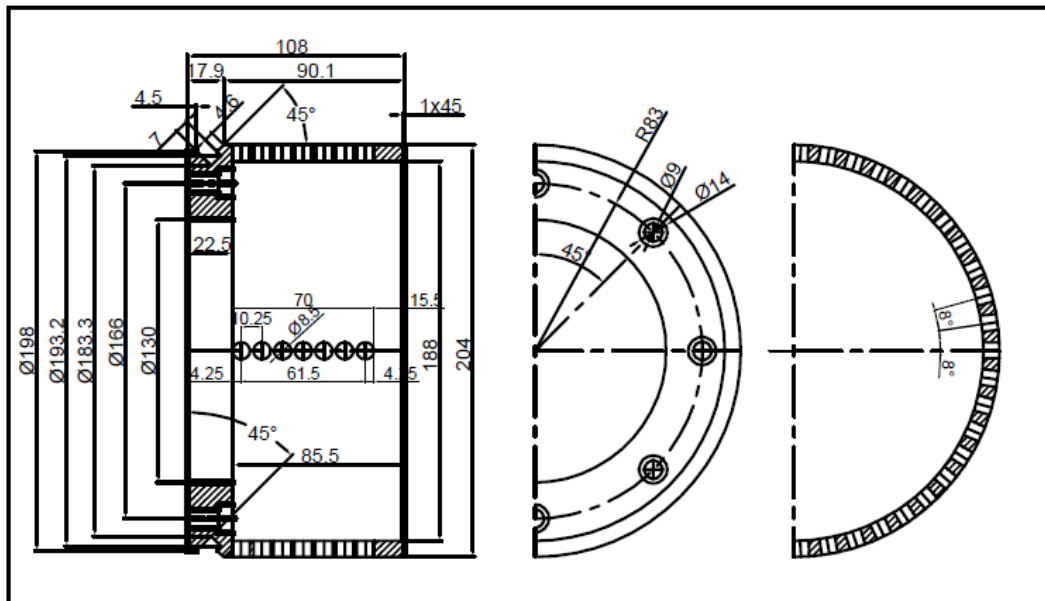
Technical Drawing DV 40 Orifice of DN 250 Plunger Valve
